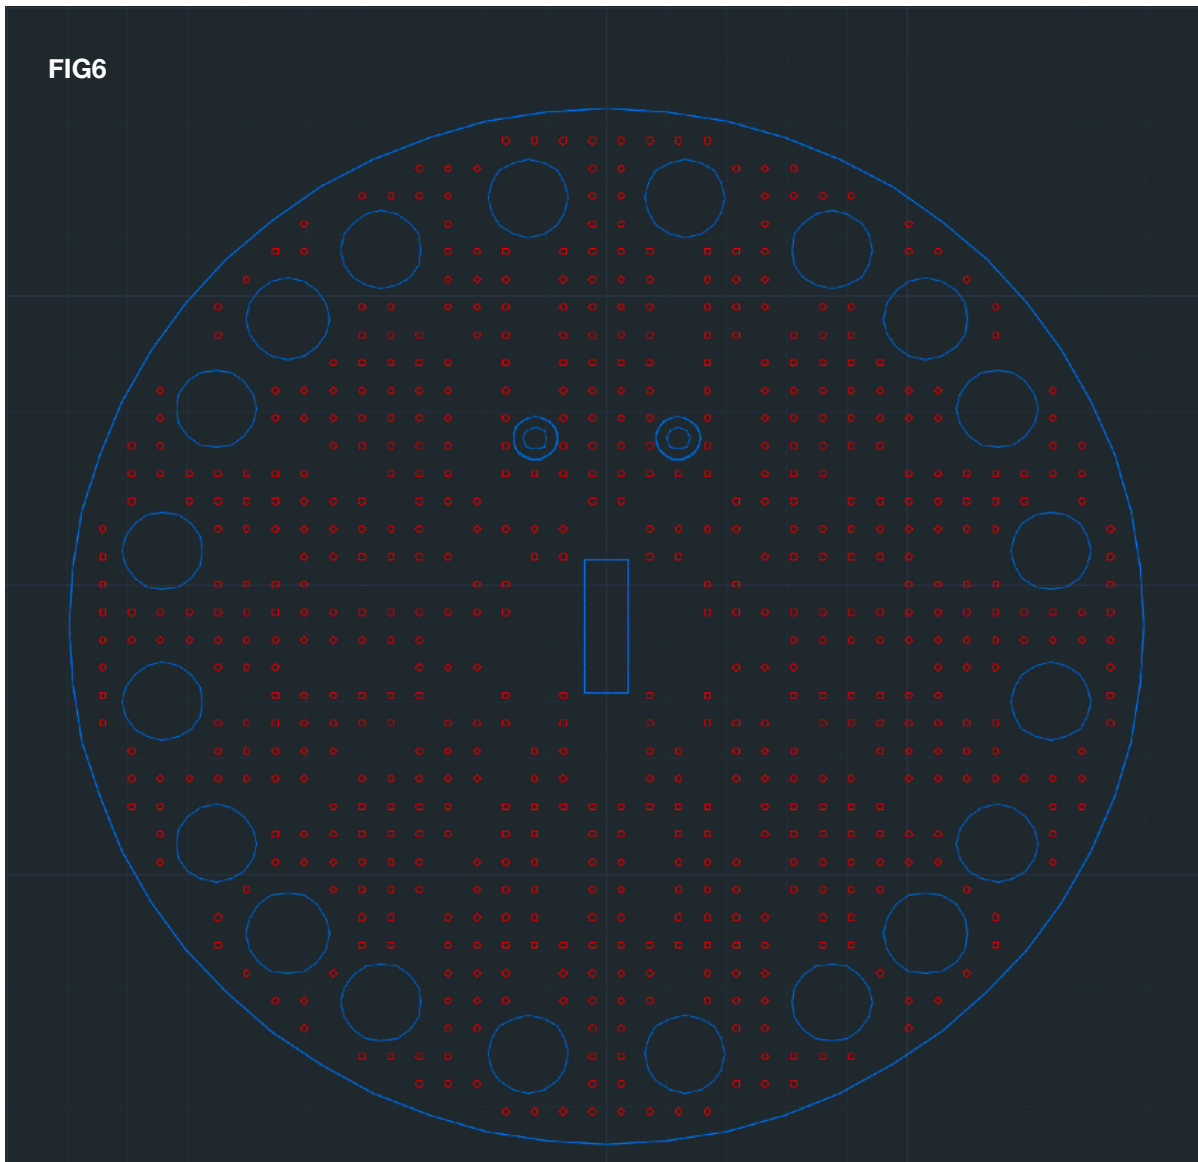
shows the bottom side of the PCB. Via holes located in a grid 1.5 mm x 1.5 mm, and diameter is 0.36 mm.
